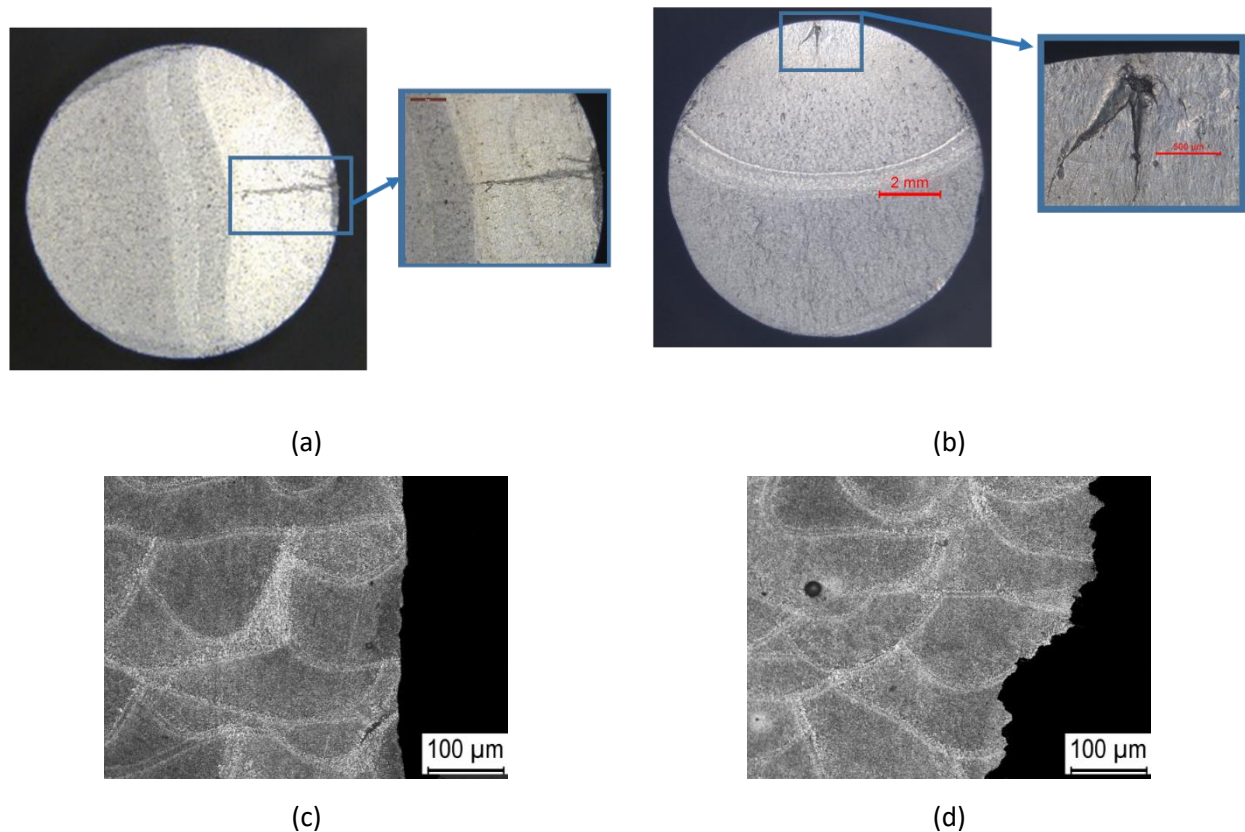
Fracture surfaces and crack propagation analysis: a) premature failure due to a large superficial scratch; b) VHCF failure from a sub-surface defect; c) crack propagation zone in AB specimen; d) final failure zone in AB specimen.
